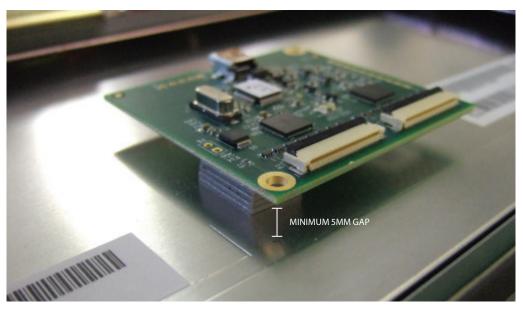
DOUBLE SIDED GASKET PADS MOUNTING OPTION
